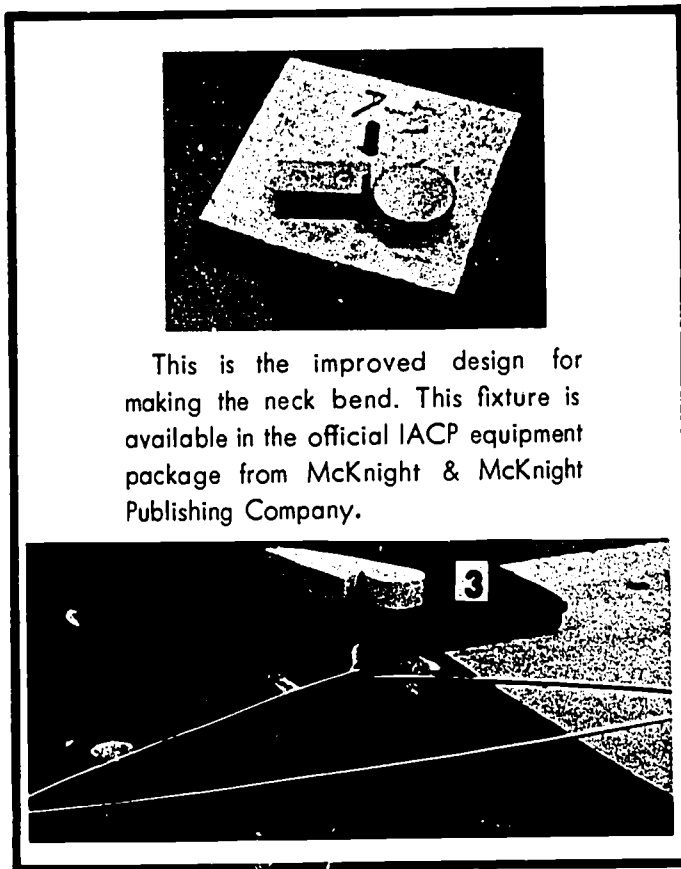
B-9. Position to Start Neck Bend in Fixture No. 7-3.
